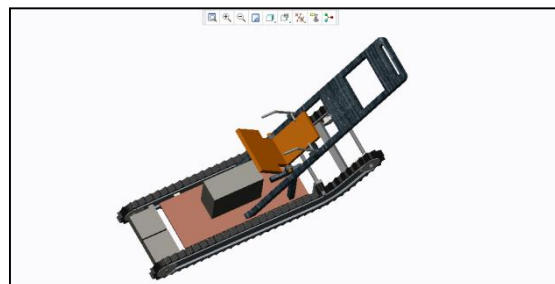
Assembling of rubber crawler with pulley drive. Rubber crawler provide the mobility to the wheelchair whenever its climb up the stairs. (Figure-2) Seating position of handicapped person while wheelchair is run on flat surface.
